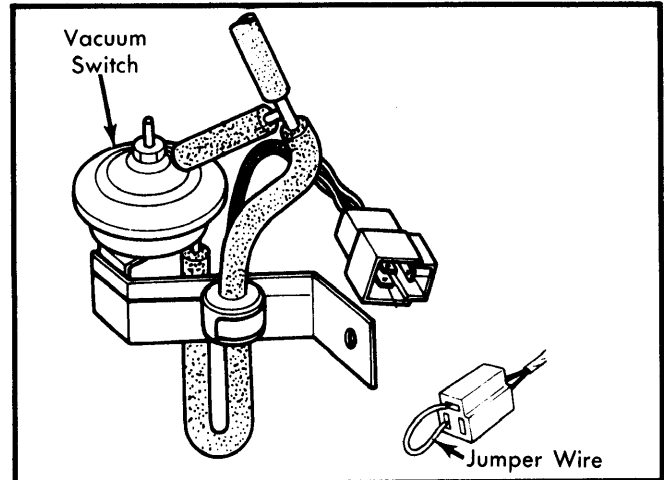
Jumper Wire Connections for Testing Vacuum Switch Coupler (Exc. Federal Man. Trans. Models)
